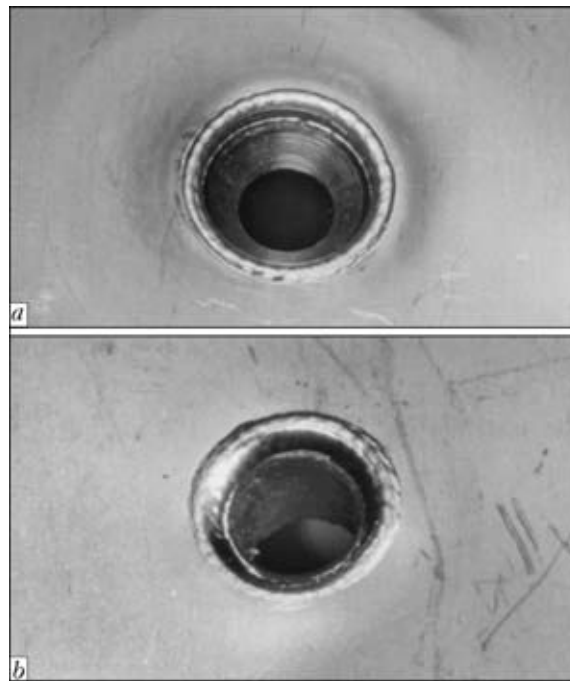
Appearance of circumferential welds in welding of flanging–thin plate ($\times 4$) on the exhaust pipe (*a*) and nipple (*b*)
